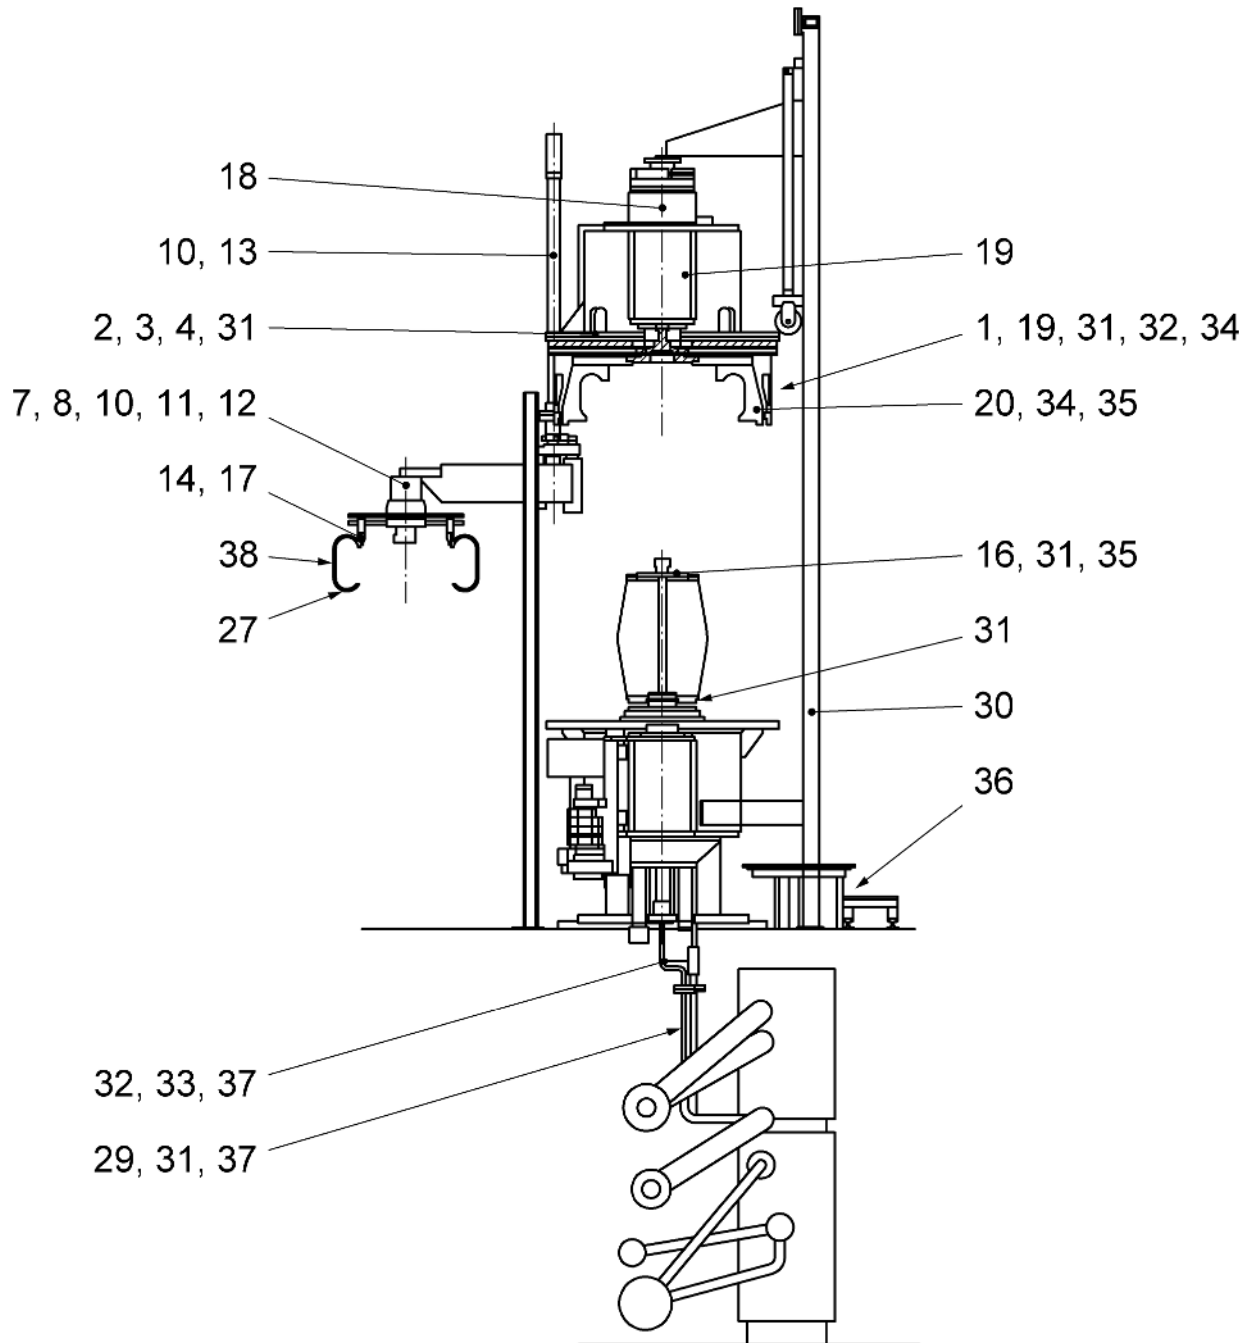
Location of hazards on tyre curing machines with automatic rear feeding and discharge (side view)
